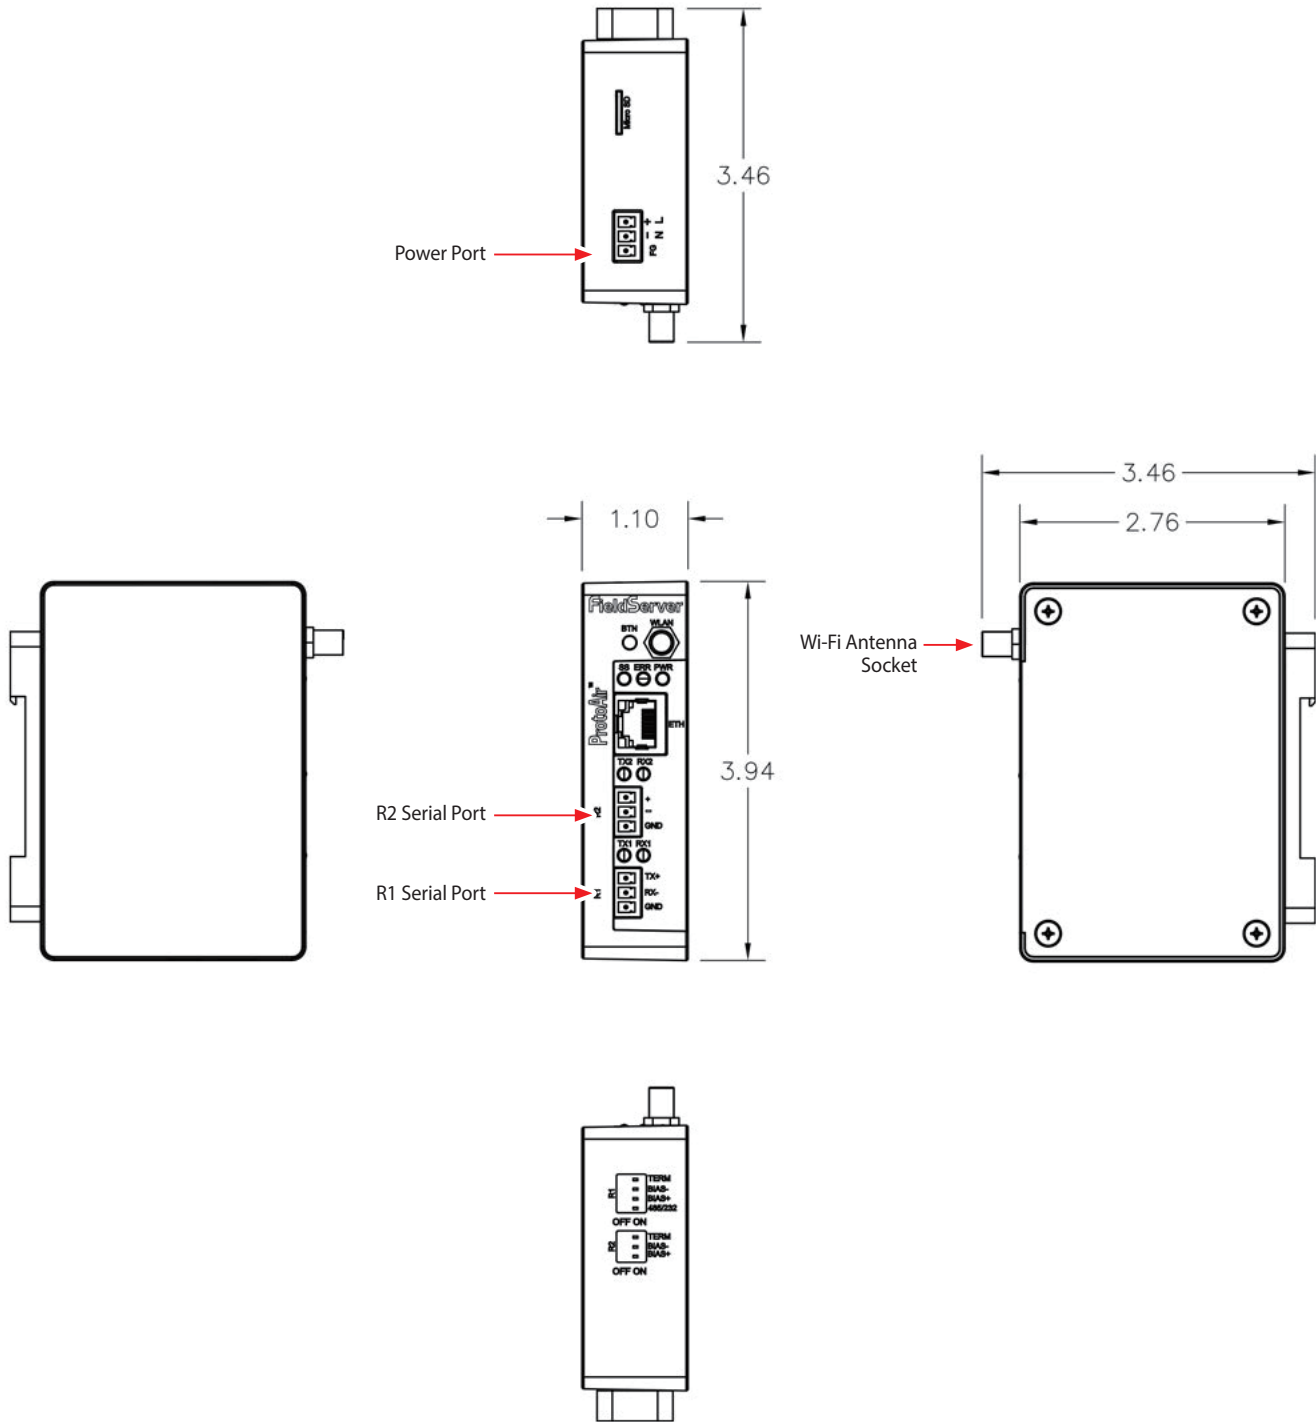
Modbus/BACnet Gateway Part Number GXXX001932 Dimensions
